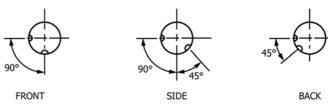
Cross-sectional View of Each Side of Square Gas Burner
